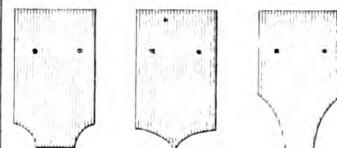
Additional Shapes Made Possible by Use of Machine.
